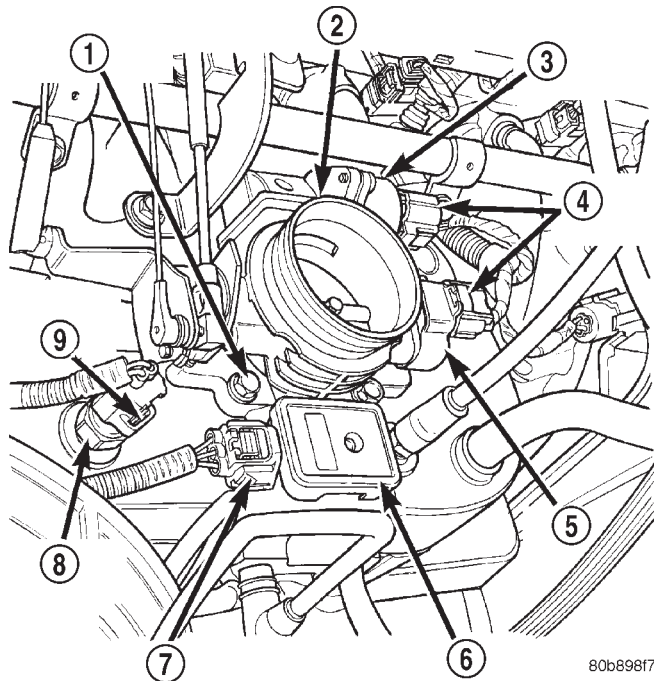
Intake Manifold Air Sensor Location—4.0L Engine
